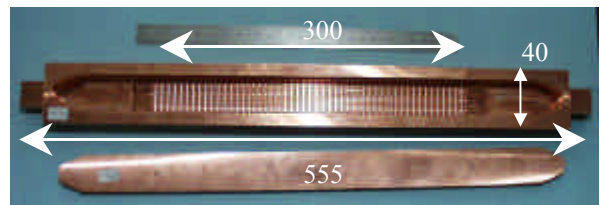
Rear view of HV40-1 before EB welding
